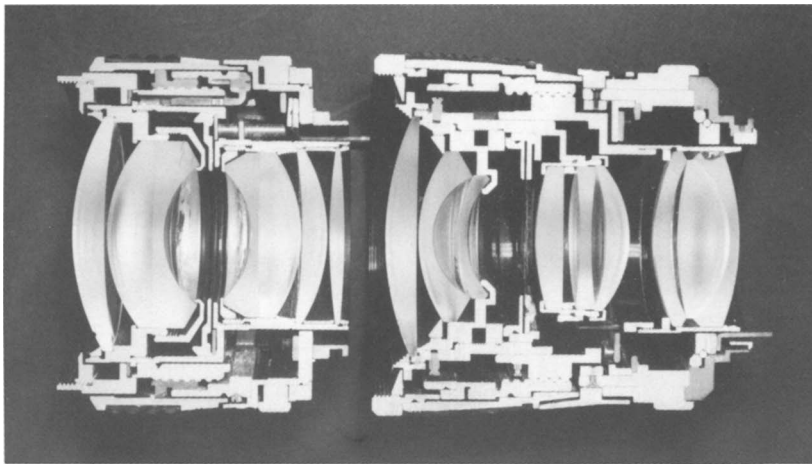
Sections of two typical modern photographic objectives, showing the complexity of the mounting
